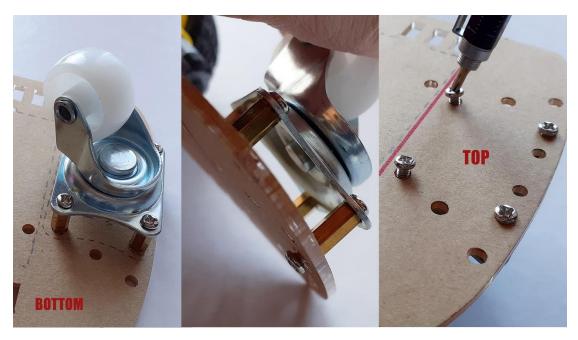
Left: Placing the caster on chassis' bottom side, Middle: Flipping the structure, Left: Binding the caster by using the four remaining screws
